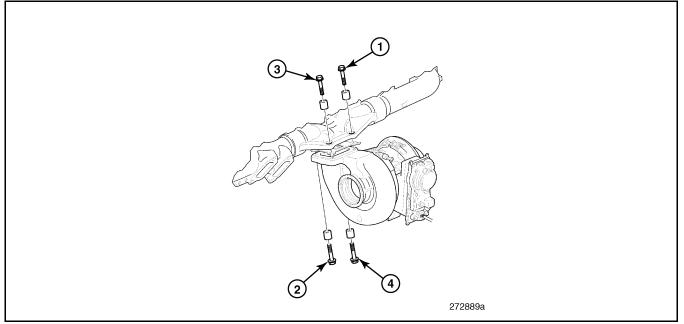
Torque Sequence — Turbocharger Mounting Fasteners
